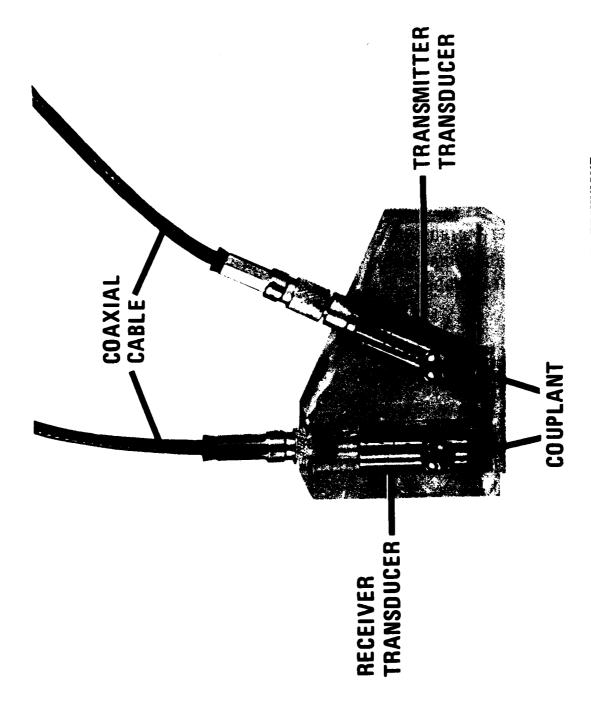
TRANSDUCER HOLDER – DELTA TECHNIQUE
